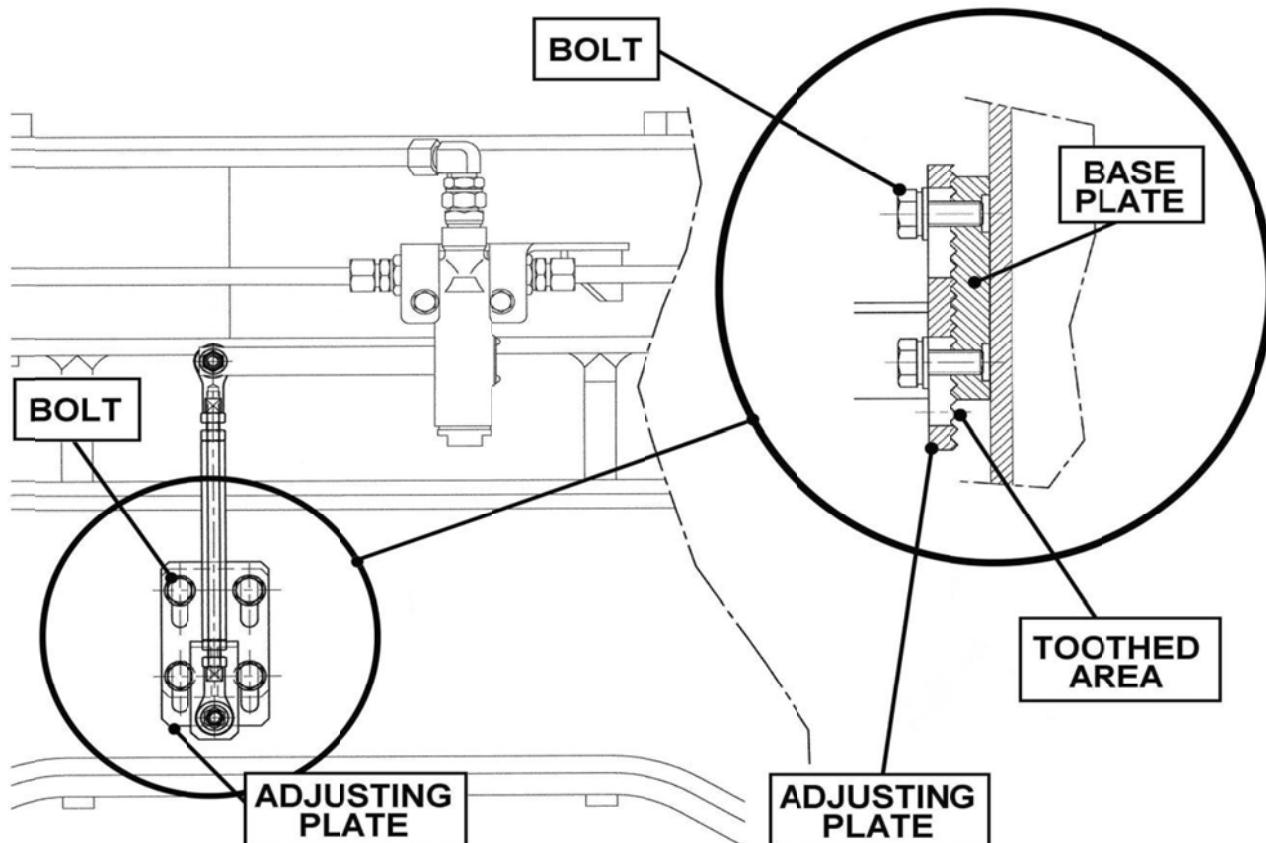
LEVELING VALVE ADJUSTMENT & BASE PLATES
